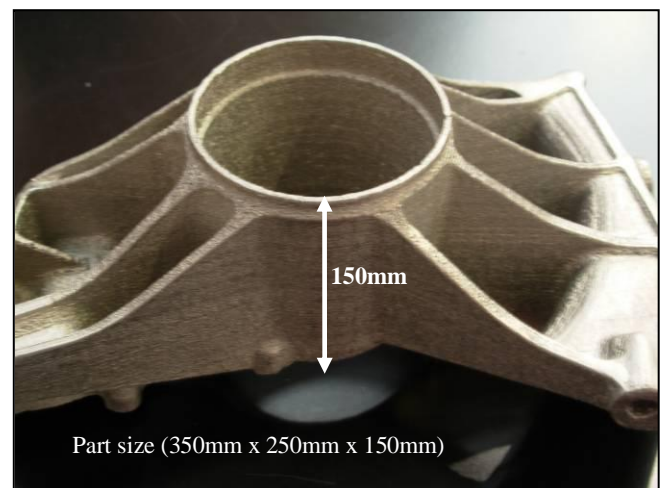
Electron Beam Melted component part, with high materials waste ratio when made using CNC machining
